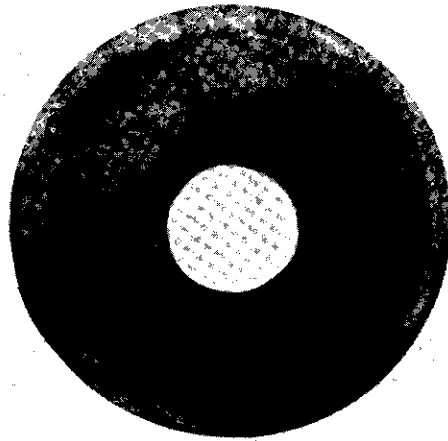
Top View of a Segmented Nozzle After Test Firing
